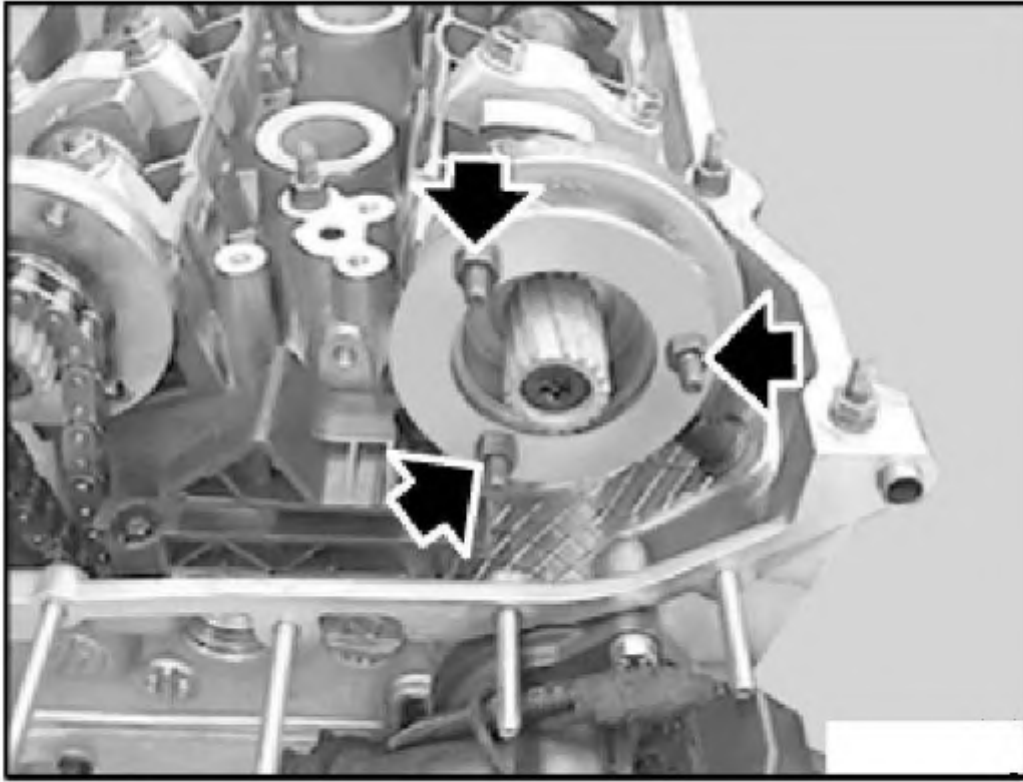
Positioning Sensor Gear On Inlet Camshaft
